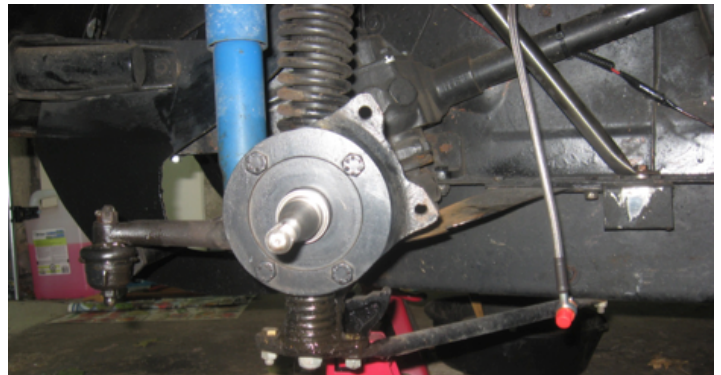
RHS. Old caliper. Original bolts will be used to secure the new calipers. However, the metal bracket which holds the rubber brake hose will be discarded. Care should be taken with the screws holding the new calipers in place: check that the bolts are the proper length. Since the bracket is not used, a flat washer may be required. Also, be informed that these bolts on my 1985 Morgan have bsf threads.
